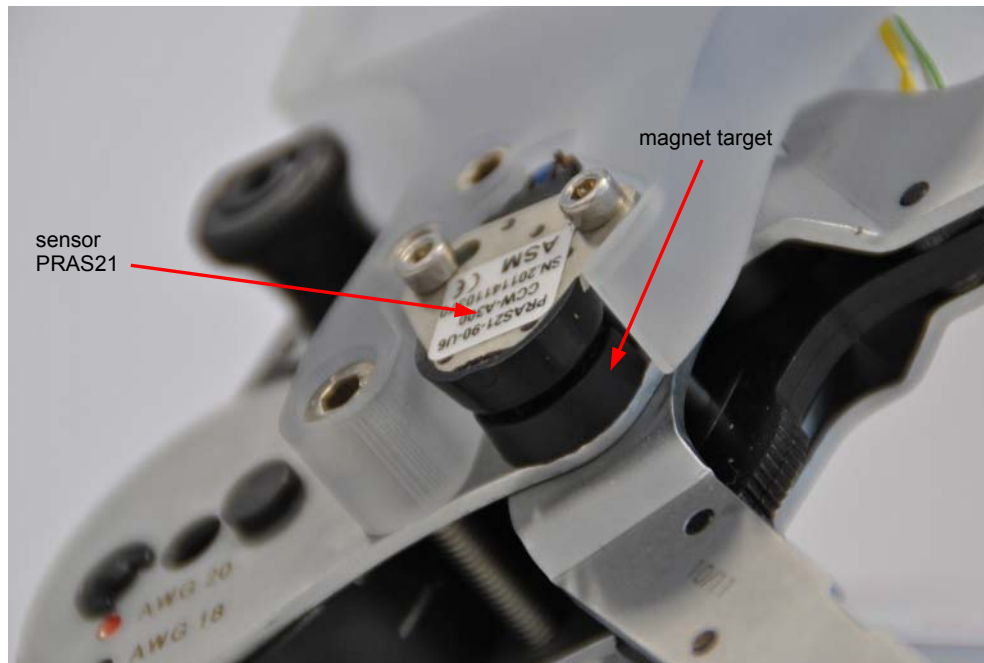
Magnet angle sensor PRAS20/21[28]
